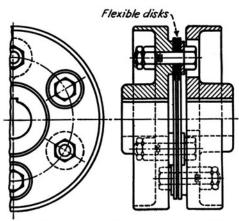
A coupling made by Aldrich Pump Company, similar to Fig. 268, except that bolts are used instead of pins. This coupling permits only slight endwise movement of the shaft and allows machines to be temporarily disconnected without disturbing the flanges. Driving and driven members are flanged for protection against projecting bolts.
